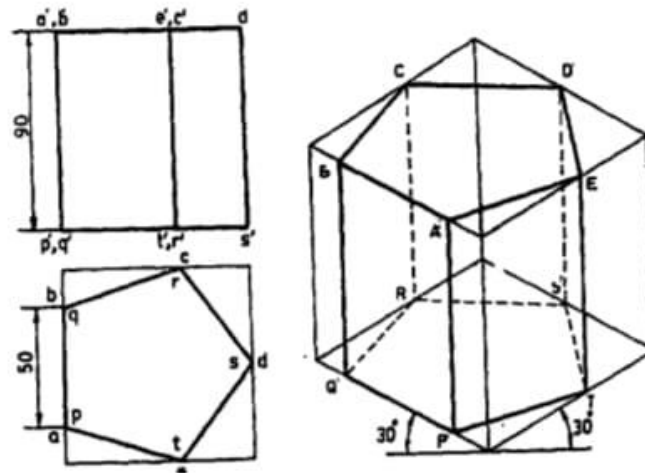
Isometric Drawing of a Pentagonal Prism
